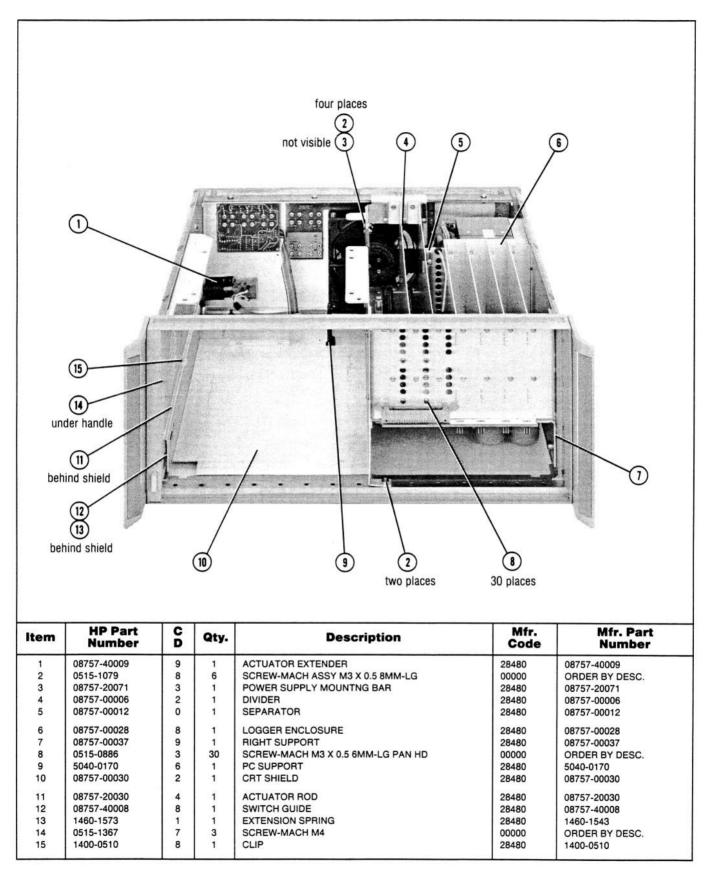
Cage Assembly and CRT Shield (9 of 10)
